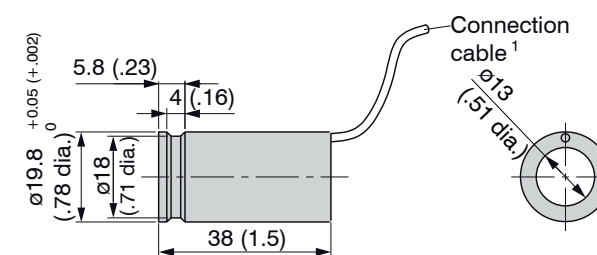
Dimensions of LVP-25-Z20, dimensions in mm (inches), not to scale
